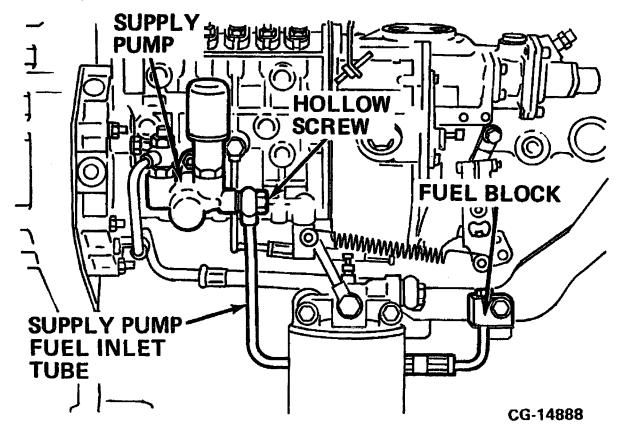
Remove the Supply Pump Fuel Inlet Tube Assembly
